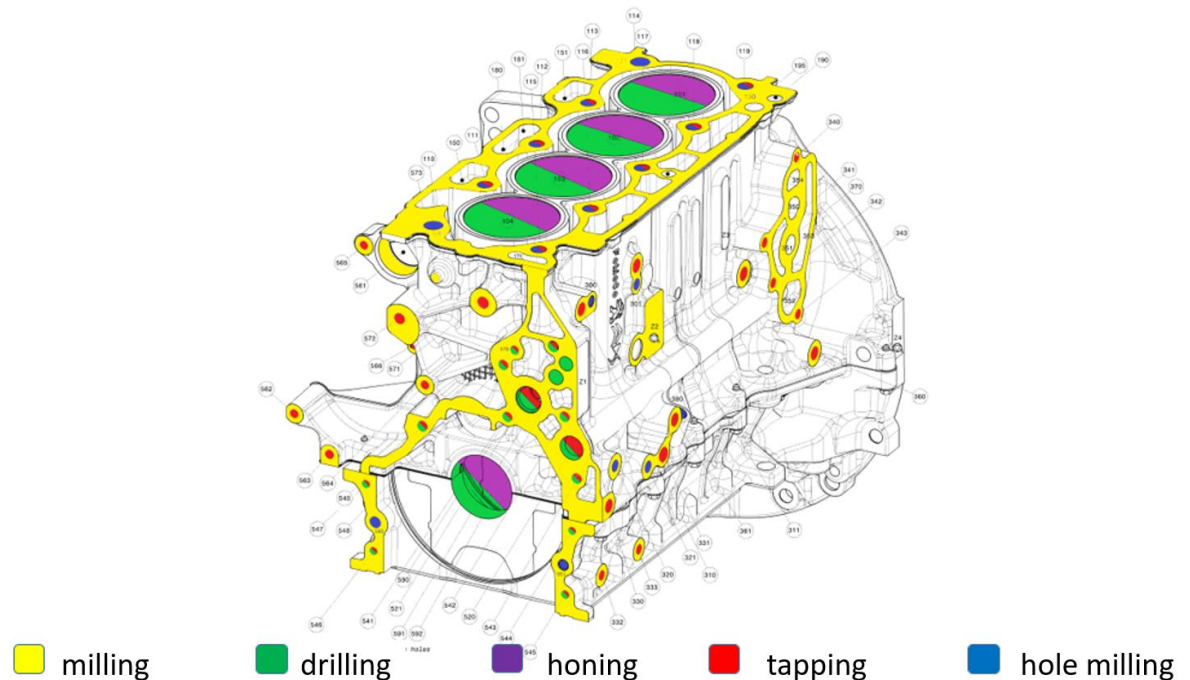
Different machined operations on the cylinder block workpiece.
